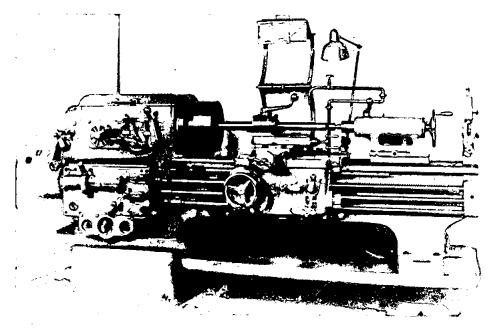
Rumania: Engine Lathe of Soviet Design Being Produced in Rumania
